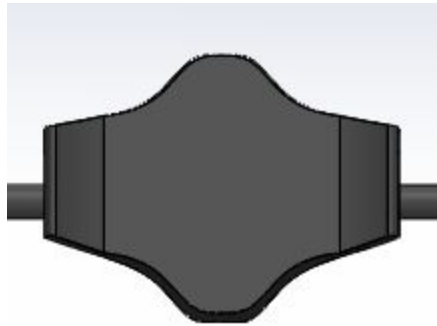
Solidworks drawing of the sheet used for the chest restraint
